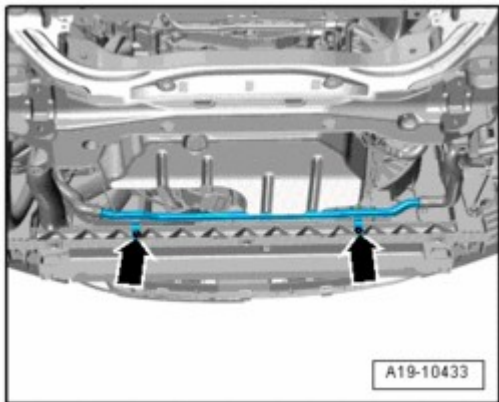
Removing Lower Coolant Pipe From Fan Shroud
